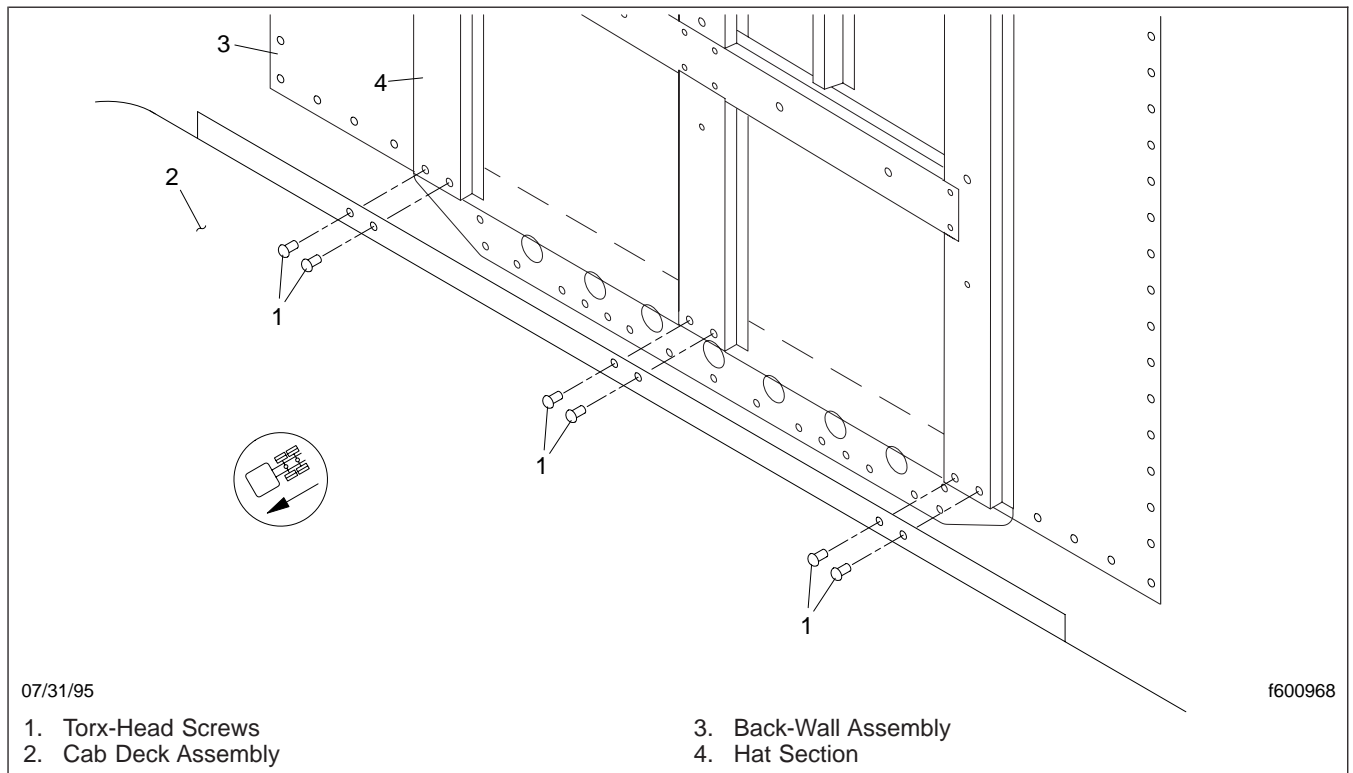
, Inside Back-Wall-to Cab Deck Fasteners
